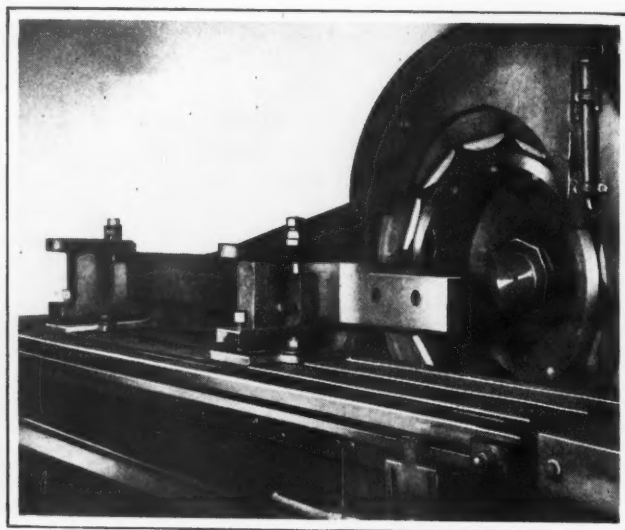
Guide Bar Clamps which can Readily be Adjusted for Locating Work in Position for Grinding
